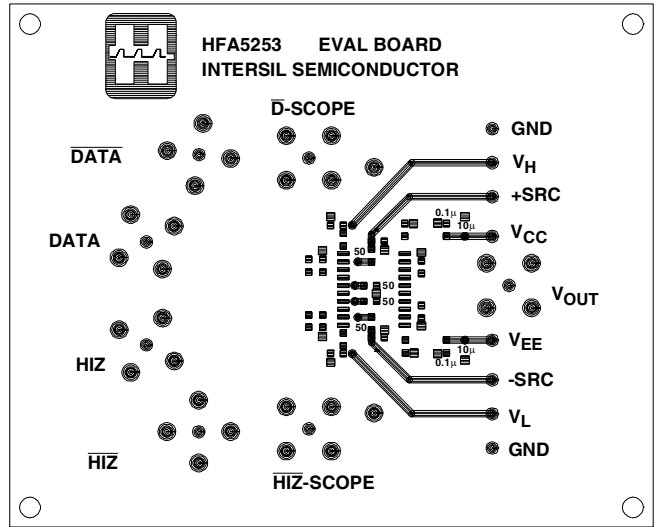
1X PC BOARD LAYOUT (TOP VIEW)
